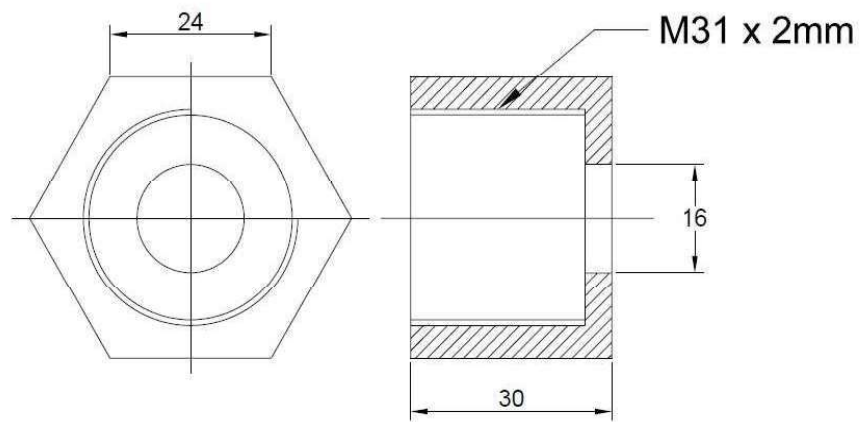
Nozzle holder Nut (all dimensions are in mm).
